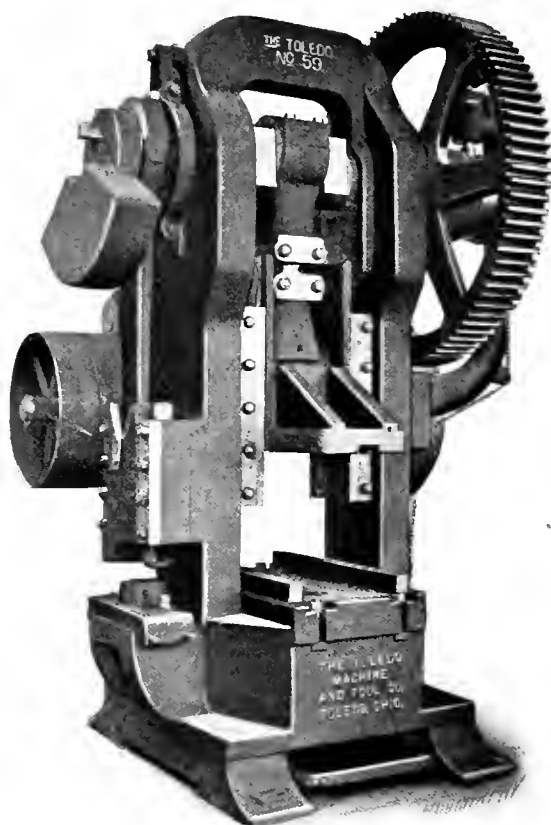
No. 59 Toledo Single-crank Trimming Press for Forgings
